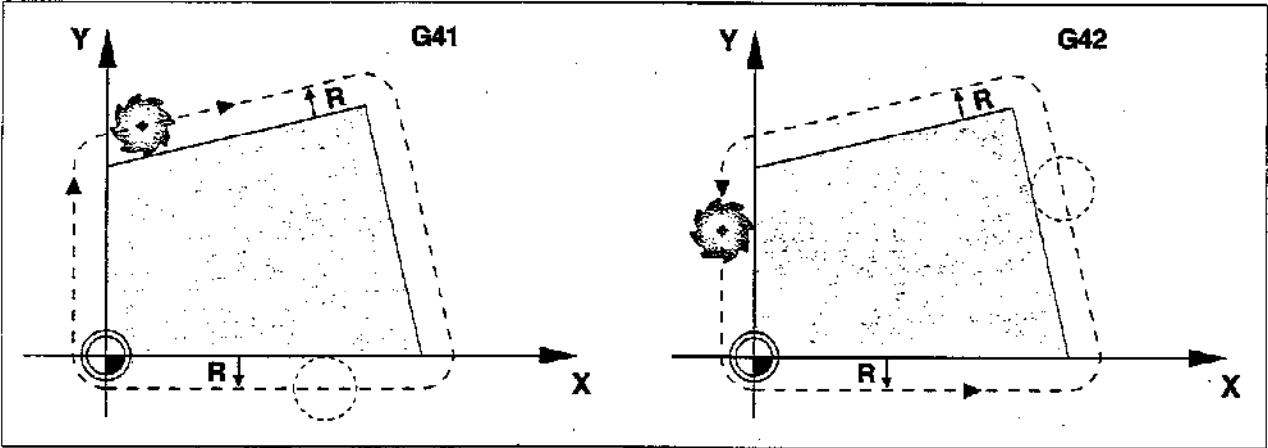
The tool moves to the left (G41) or right (G42) of the path during milling
